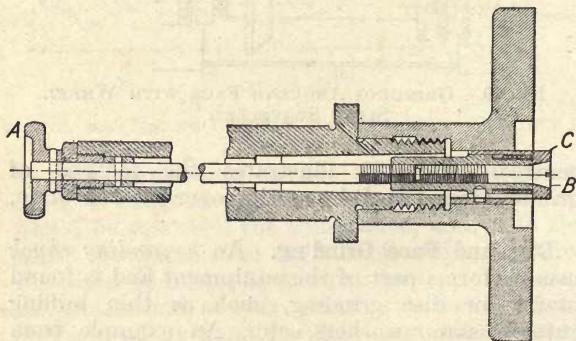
EXPANDING ARBOR FOR DISC GRINDING
